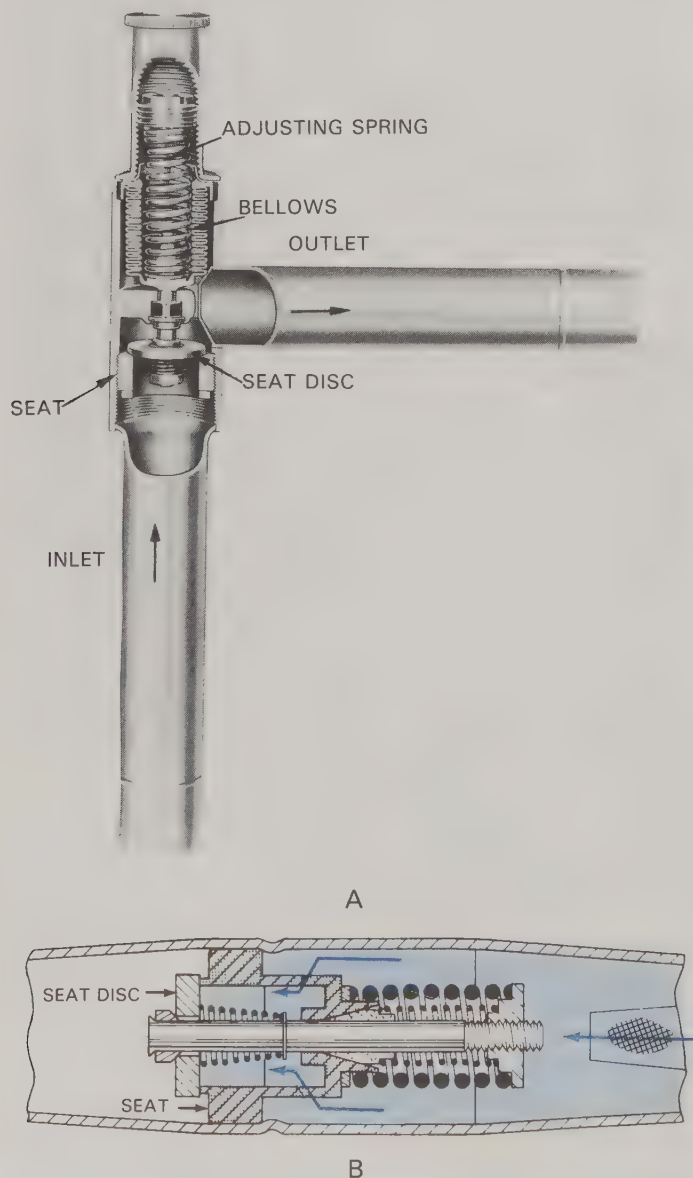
Head pressure control. A-Cutaway of adjustable-type head pressure control valve. B-Cutaway of differential valve. (Sporlan Valve Co.)
